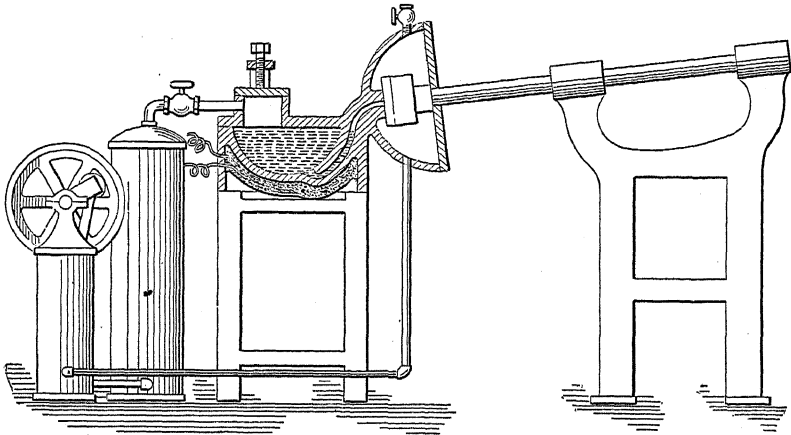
MACHINE WITH DIE ENCLOSED IN VACUUM CHAMBER.
